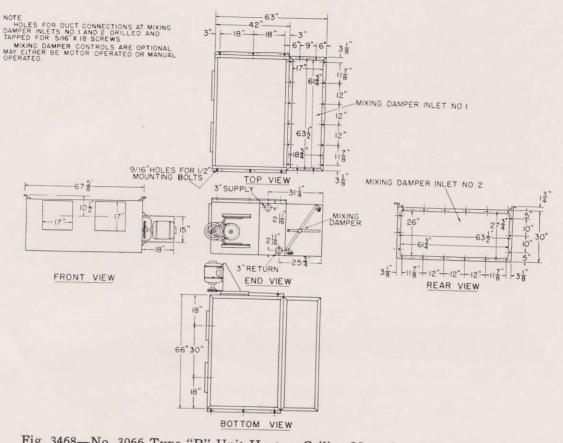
No. 3066 Type "R" Unit Heater. Ceiling Mounting, Mixing Damper.
